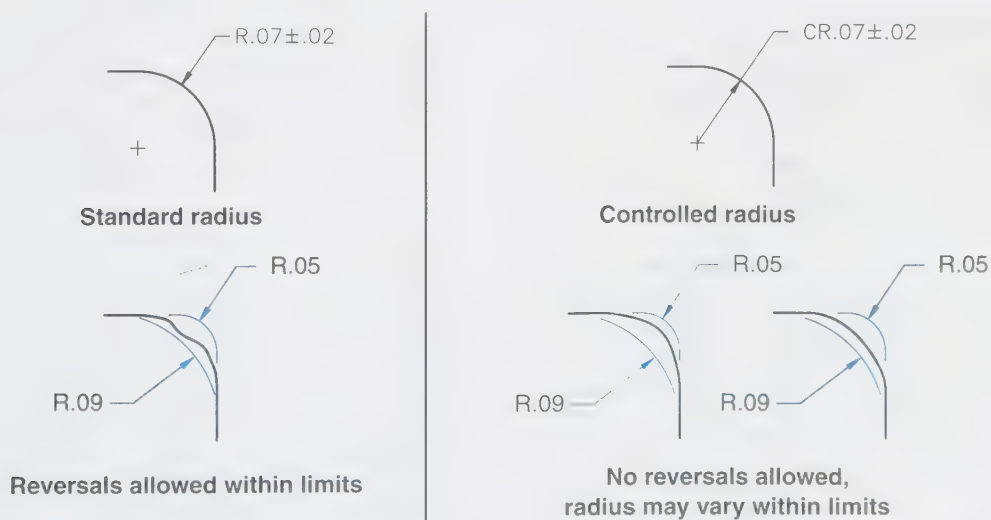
A curved surface must fall within the size limits defined by the radius dimension.
